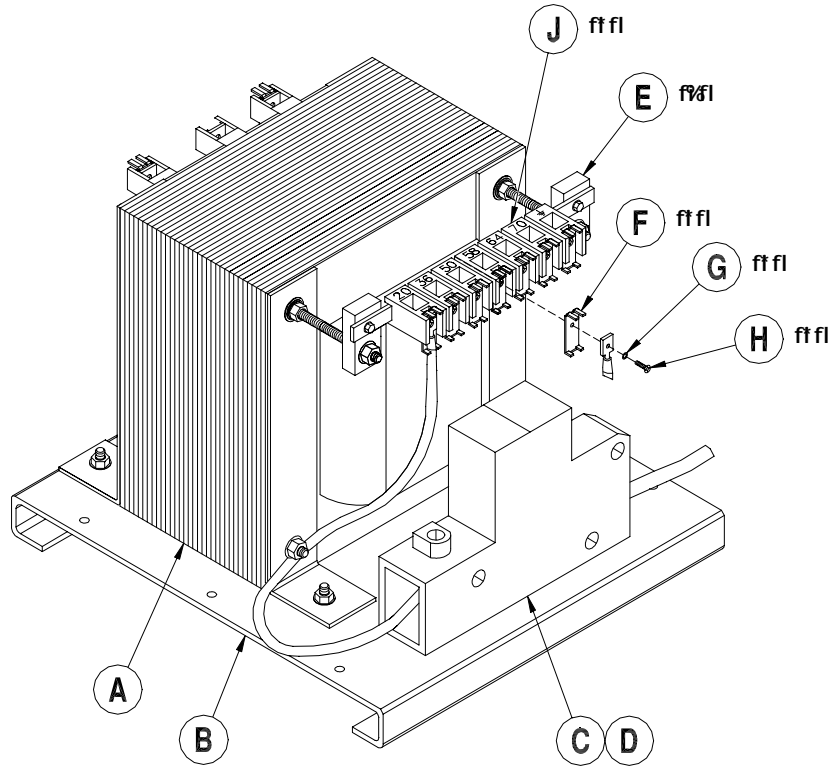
Base Assembly (Part No. 55501A-5HP-3PH), Exploded View
